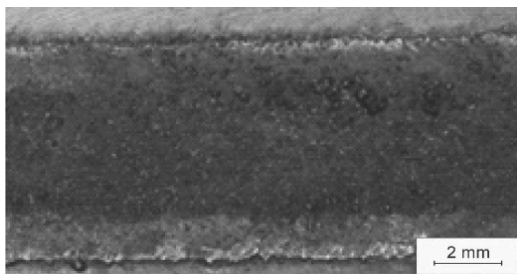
View of the MCMgAl9Zn1 cast magnesium alloy face of weld after laser treatment with SiC powder, scan rate: 0.5 m/min, laser power: 2.2 kW
